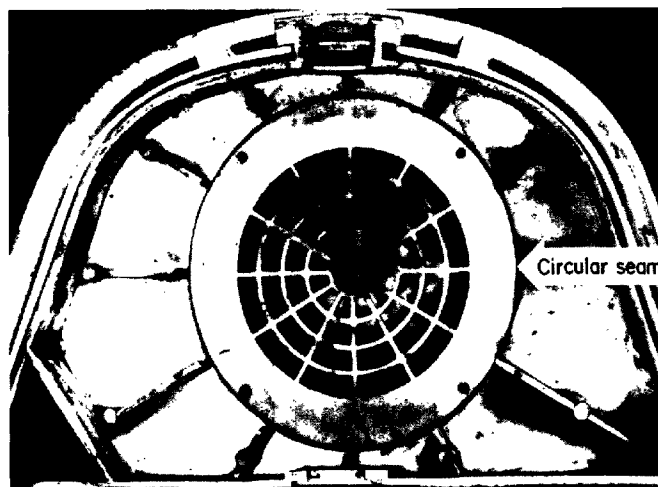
Motor housing assembly on RACAL Airstream Helmet.
